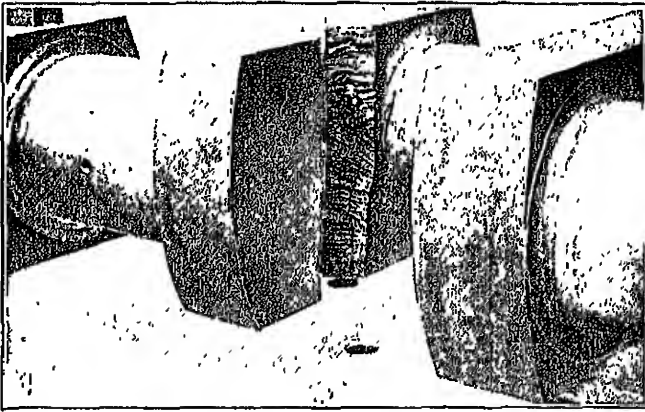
Crankshaft with Break Cut away for Welding.
